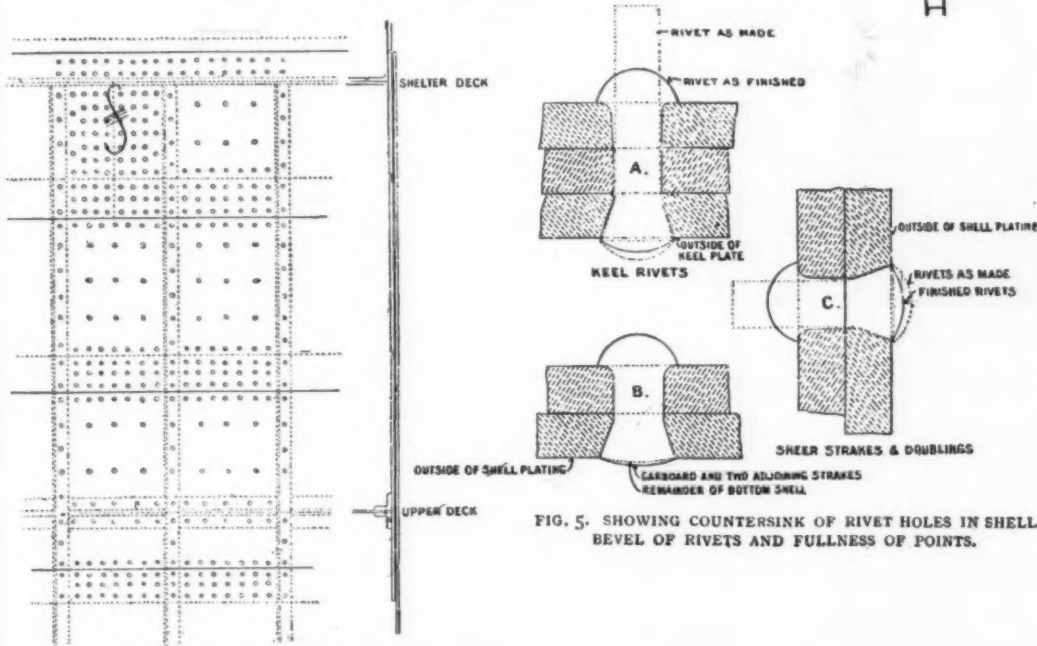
SHOWING ARRANGEMENT OF SEAMS OF TOPSIDE PLATING TO SUIT HYDRAULIC RIVETING AND CONNECTIONS OF PLATING AND DOUBLINGS.
